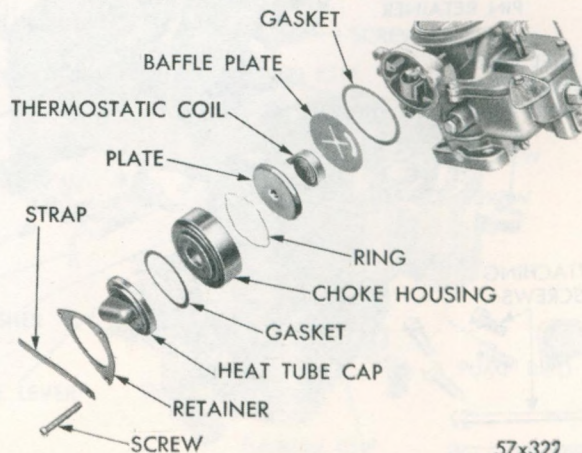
Removing or Installing Choke Baffle Plate and Gasket
